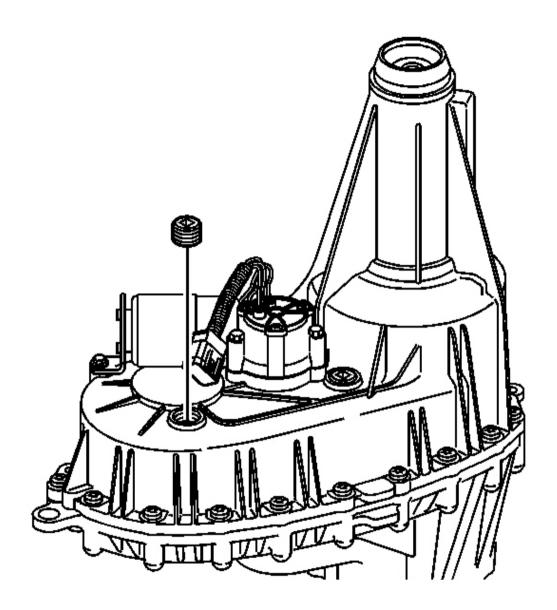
View Of Drain & Fill Plug Courtesy of GENERAL MOTORS CORP.
